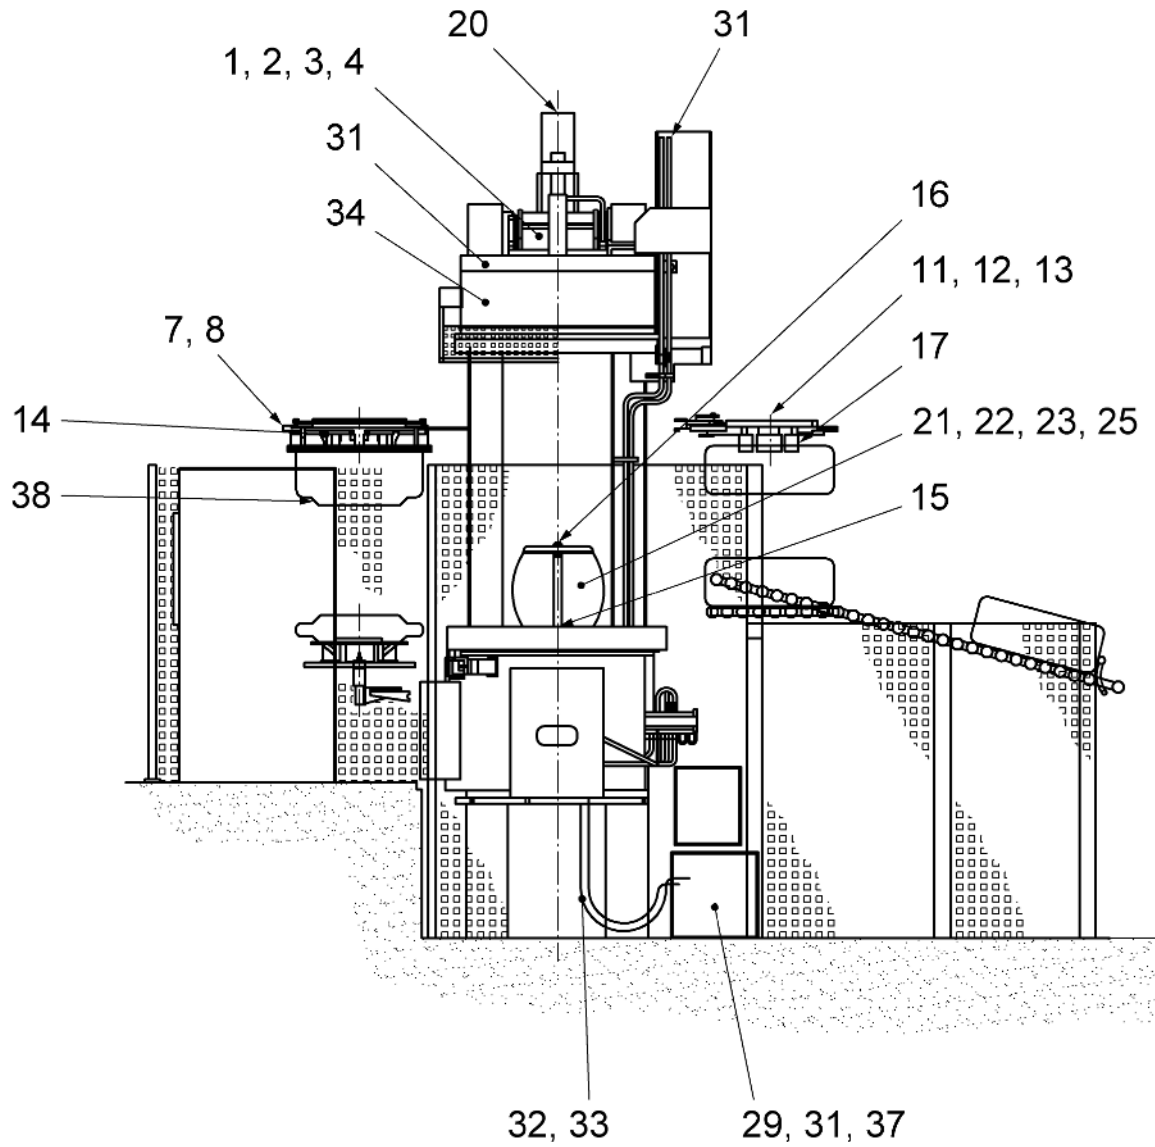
Location of hazards on crossing flow tyre curing machines (side view)
